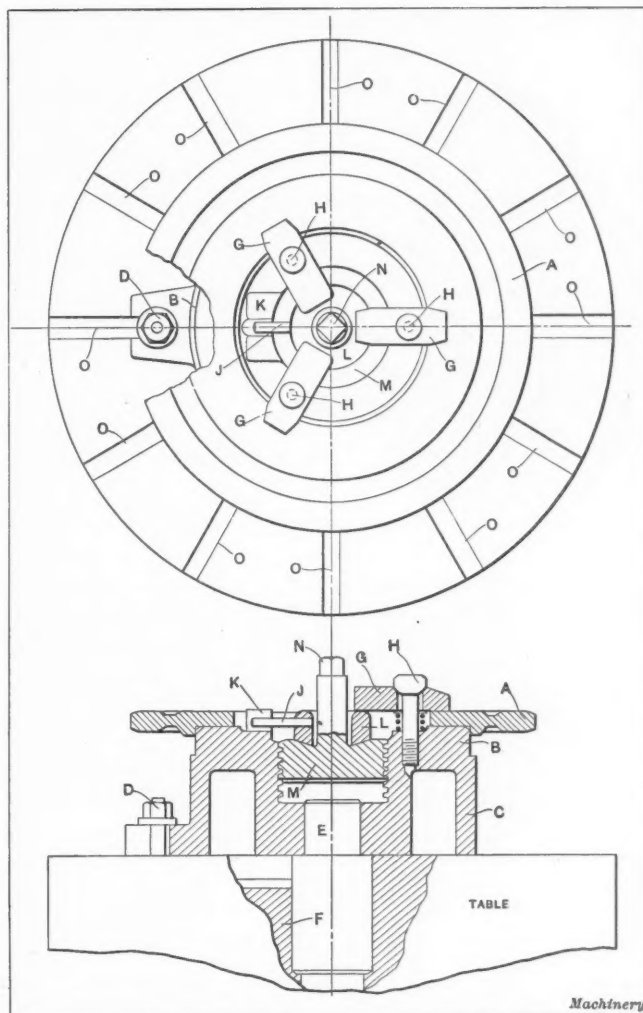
Compensating Clamping Fixture for Steel Sprocket Gear
